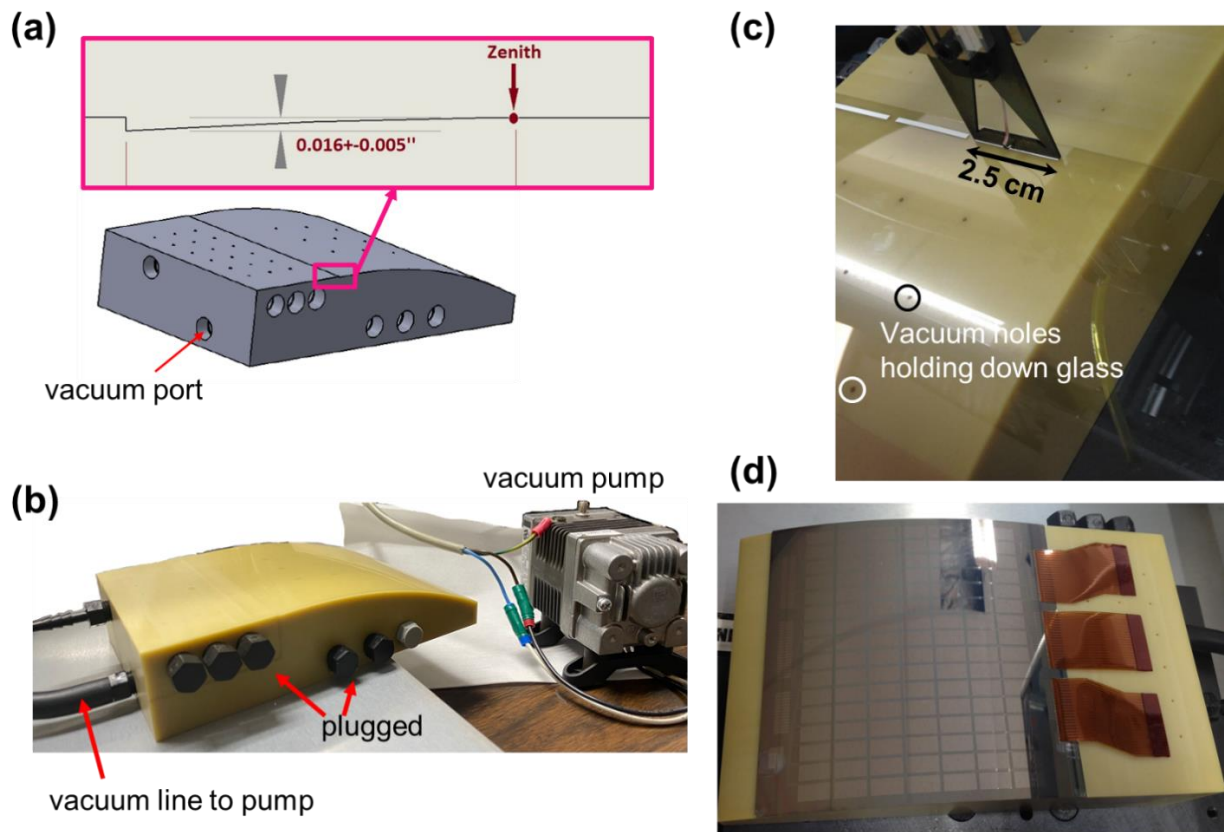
The mandrel for supporting, vacuum-holding, and orienting the mirror during ACF bonding. (a) The Solidworks drawing of the designed mandrel consisting a flat part for holding the cables and a curved part for holding the mirror. The vacuum holes at the surface were connected to the pathways in the body which were evacuated by a vacuum pump. (b) The mandrel was machined by the Penn State machine shop using glass-filled ULTEM® as the material. (c) The ACF tacking being performed on a bare curved glass on the mandrel for practice purposes. (d) An HFDFC candidate mirror having the ribbon cables finished bonding on one side.
